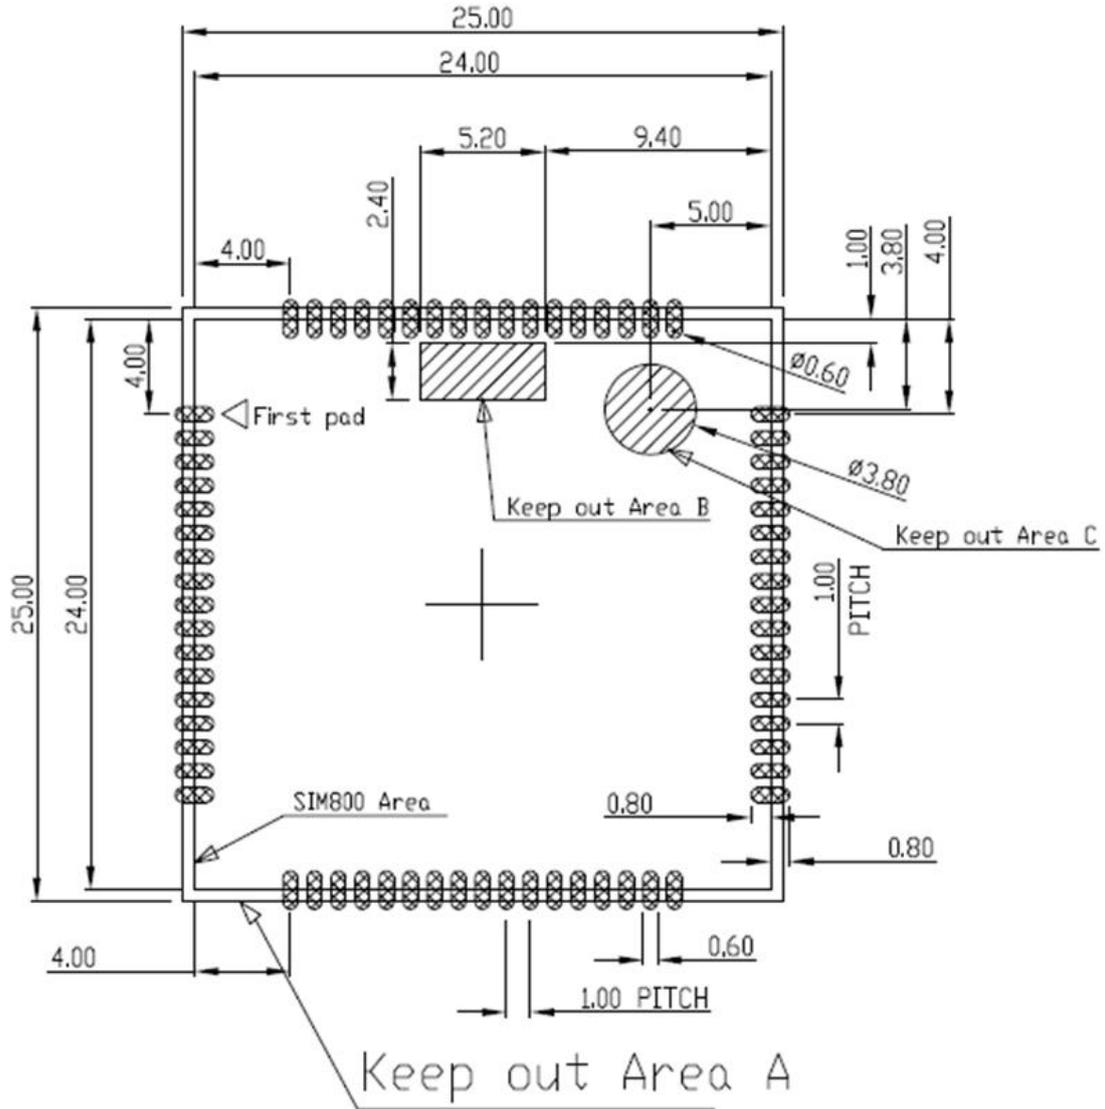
Recommended PCB footprint outline for SIM800 (Unit: mm)
